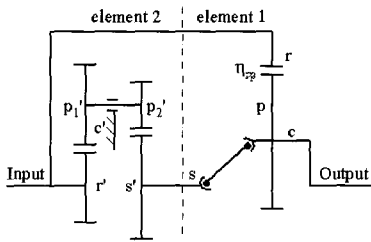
Equivalent differential gear unit for input coupled configuration 1 without an idler gear (f)
